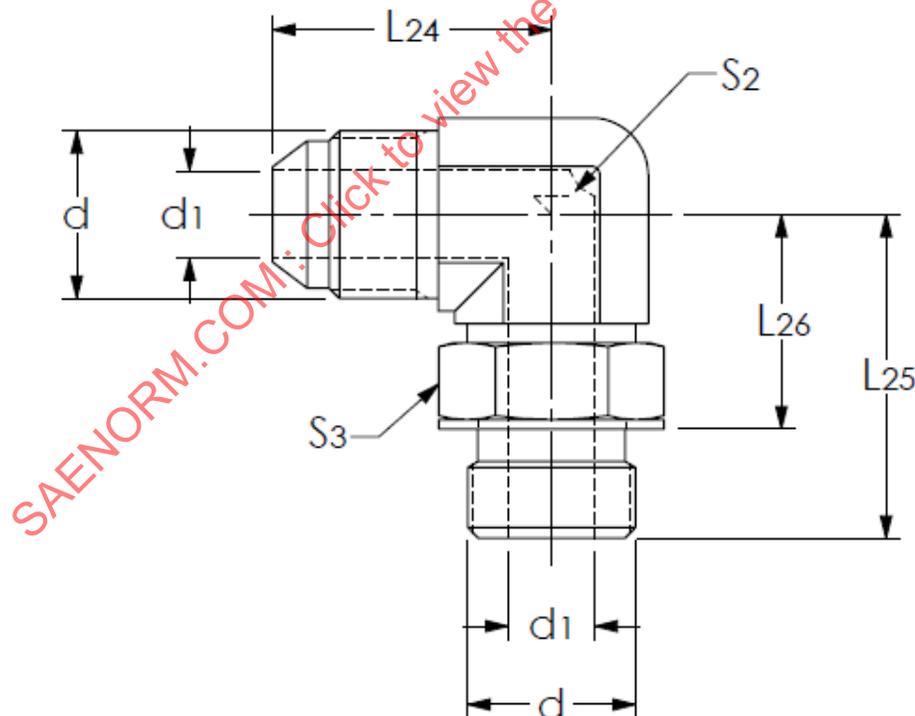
90 degree straight thread elbow (070220, 07M0220)
